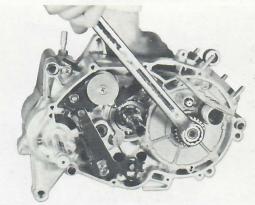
Loosening primary drive gear set nut with 21 mm wrench and piston holder (special tool No. 09910-20111)
